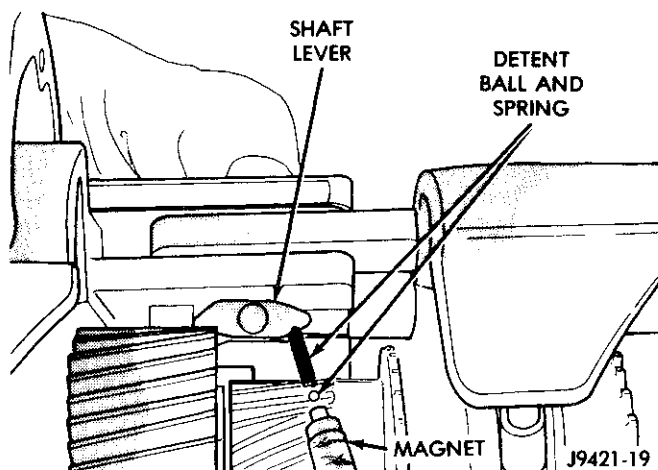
Removing Shift Shaft Lever Detent Ball And Spring
